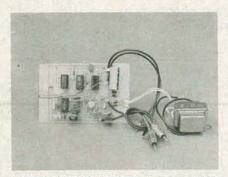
SHOWN HERE is the completely assembled PC board. Note that this board contains all of the components.
